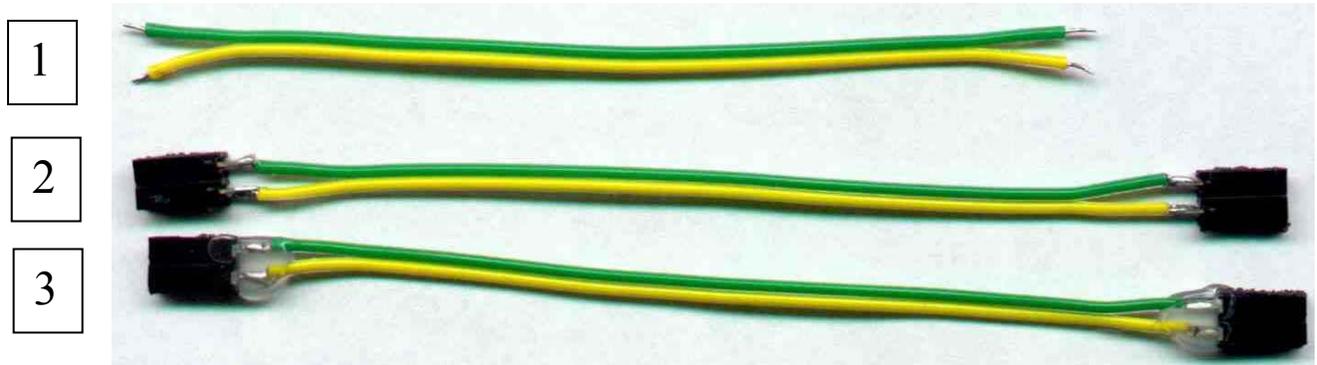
F2W2F2 IR EMITTER CABLES: CIRELF (4 inches), CIREB (6 inches), CIRERF(4 inches).
